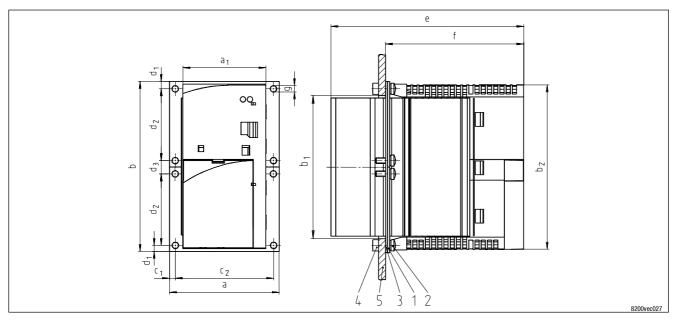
Dimensions for thermally separted mounting 0.25 ... 0.75 kW
